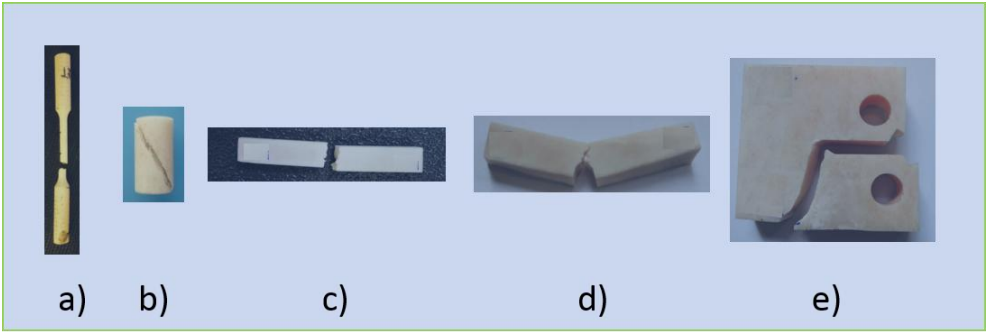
Failure mode of all the samples: a) Tensile, b) Compressive, c) Flexural, d) SE(B) for fracture toughness, and e) C(T) for fracture toughness.
